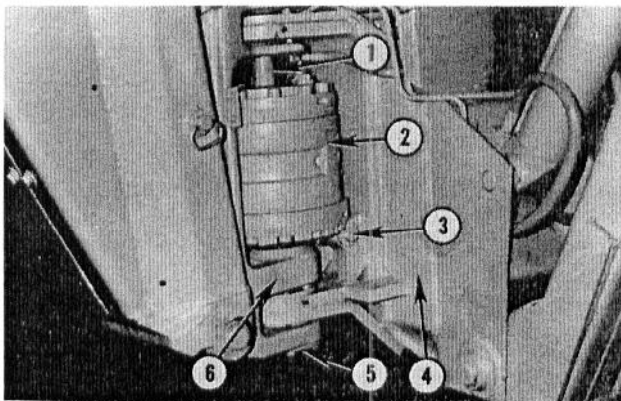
Swing Cylinder Installed — MF 54A Backhoe Shown
